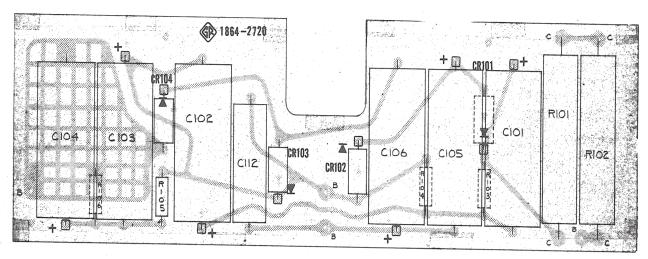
Type 1864 rectifier circuit etched-board assembly (P/N 1864-2720)
